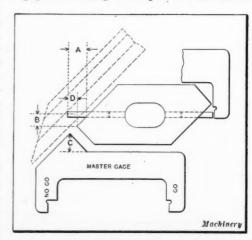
Gage for Depth of Counterbore of Angular Hole in Fuse Body
